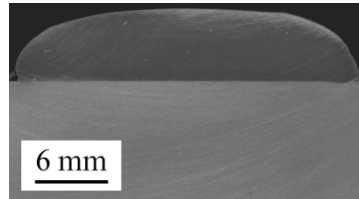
Cross-section of a sample welded with welding parameters C
